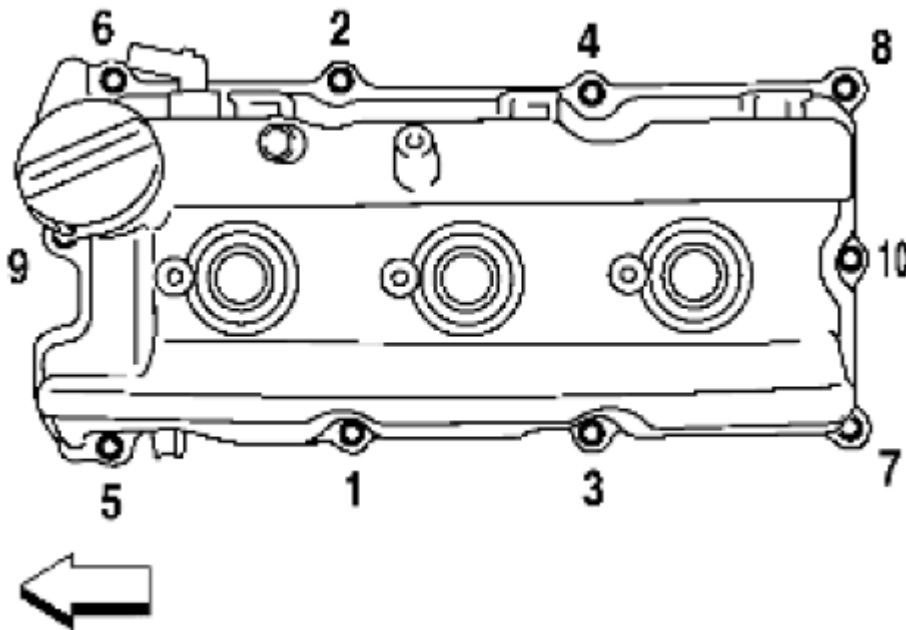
Identifying Rocker Cover Bolts Tighten Sequence
